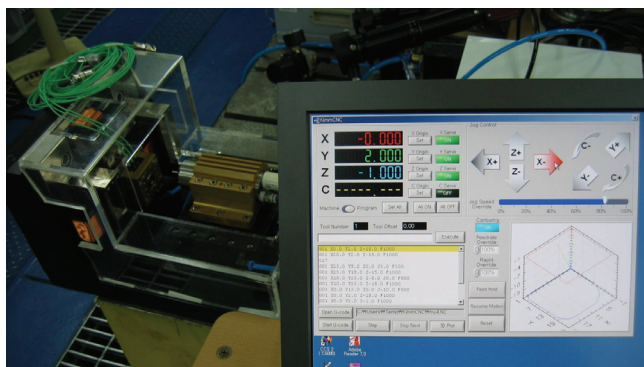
Experiment of the NC system with a 3-axis desktop milling machine
